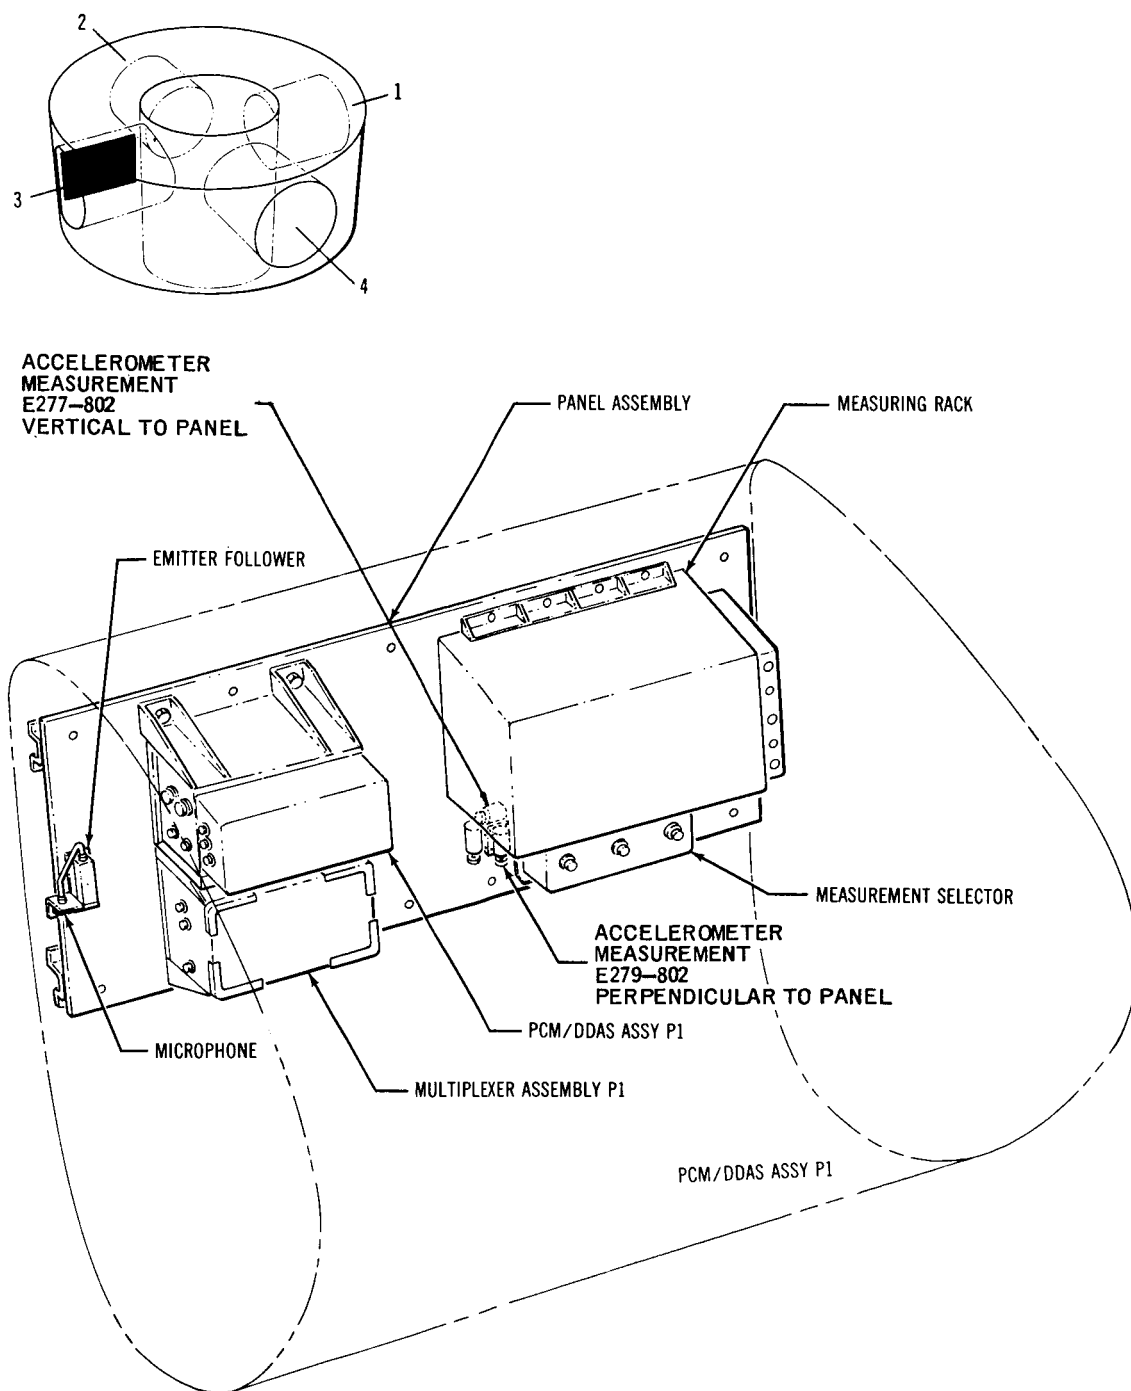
S-IU-6 INSTRUMENT UNIT, TUBE 3, LEFT SIDE
